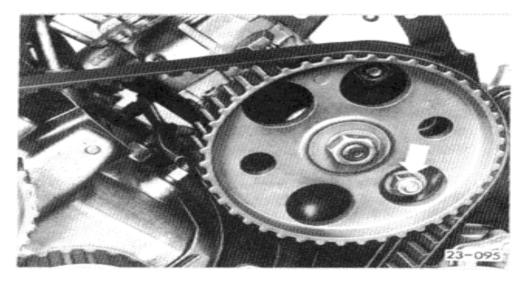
Lower mounting plate bolt (arrow) accessible through hole in the injection pump sprocket.
